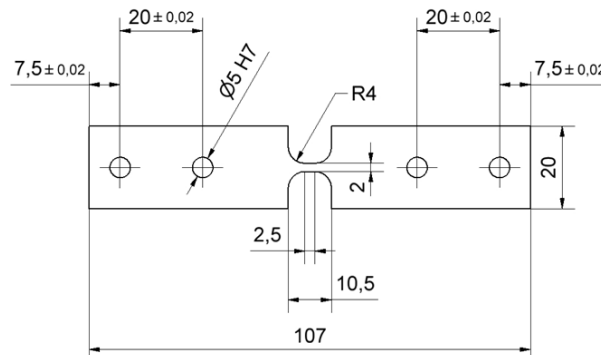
Geometry und dimensions (in mm) of the specimens. Thickness $t = 1.2$ mm.
